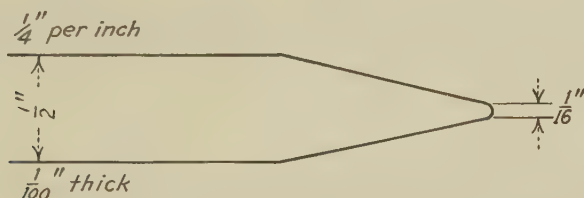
GAGE FOR MEASURING CRACKS IN PIPE
